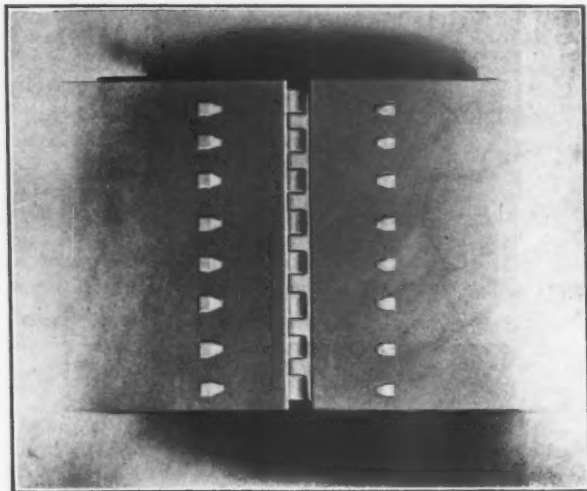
View of the Inside of Belt and Coupling After Hooking.
